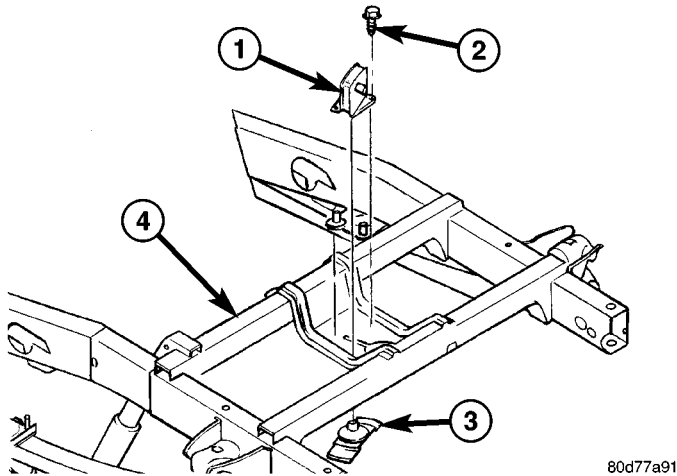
SPARE TIRE WINCH ASSEMBLY
